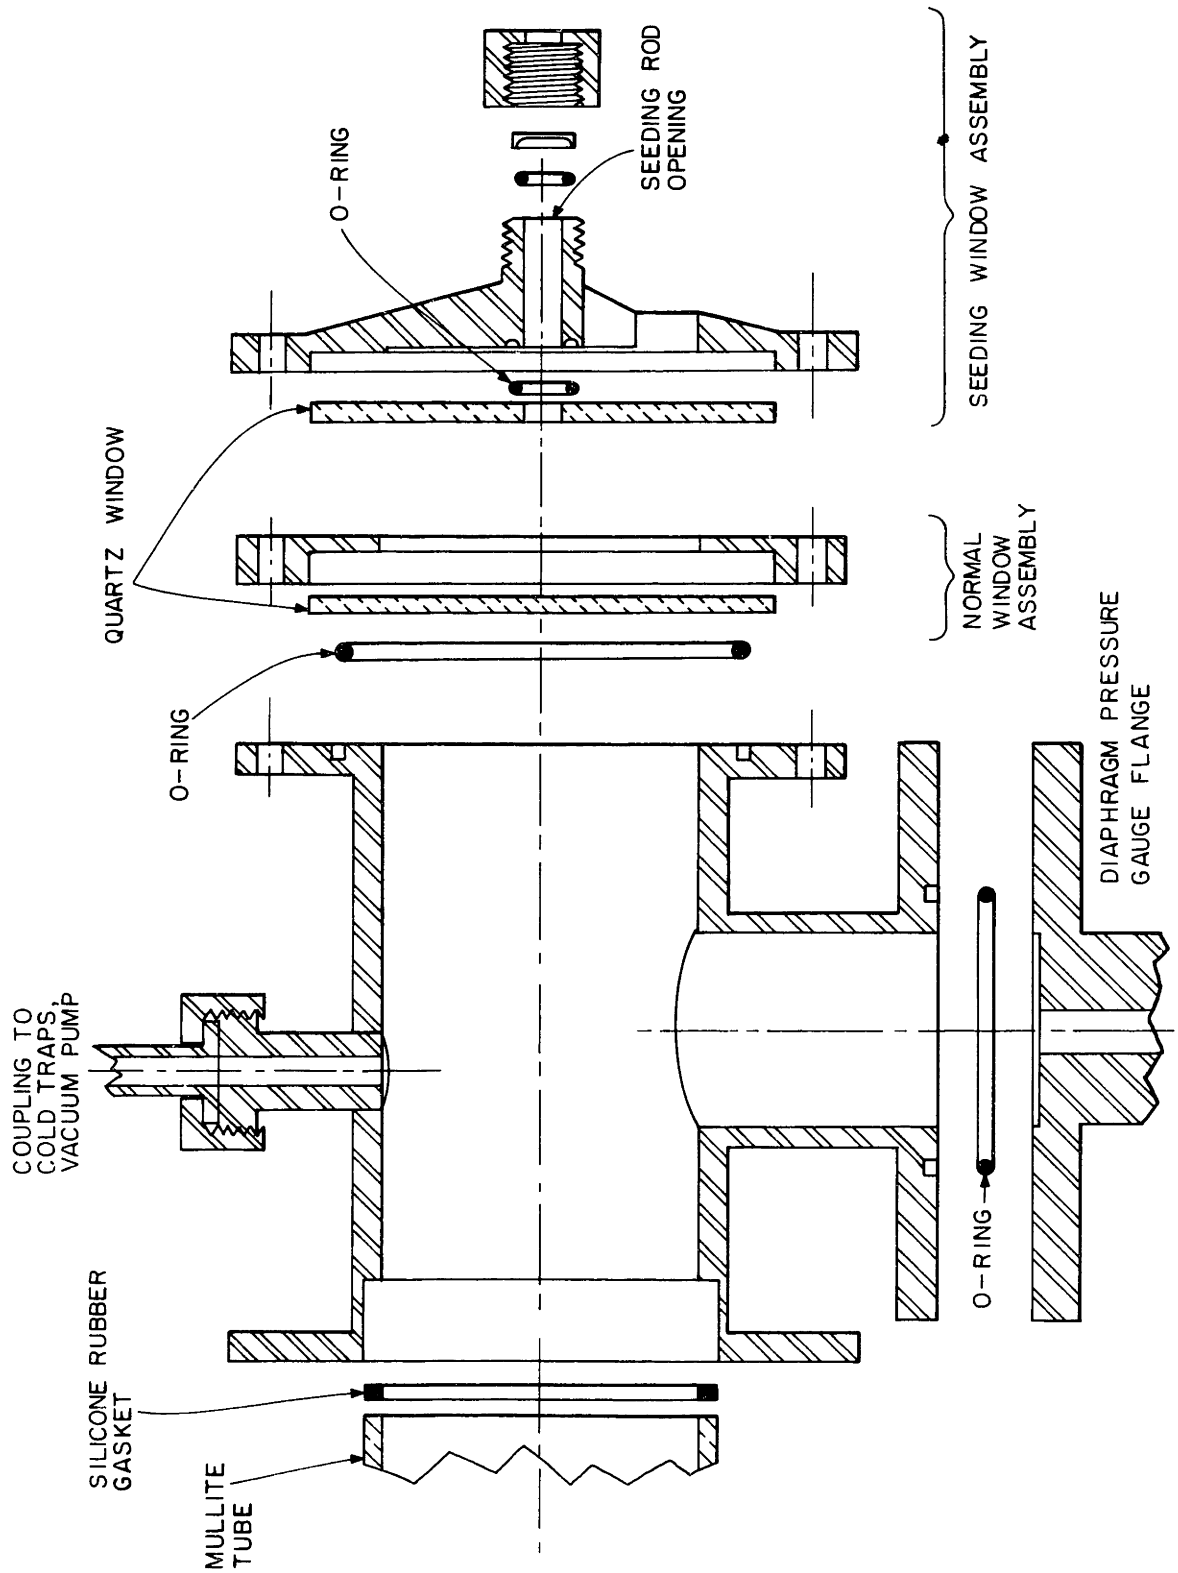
Exploded cross-sectional view of the output endcap with the normal window assembly and the seeding window assembly.
